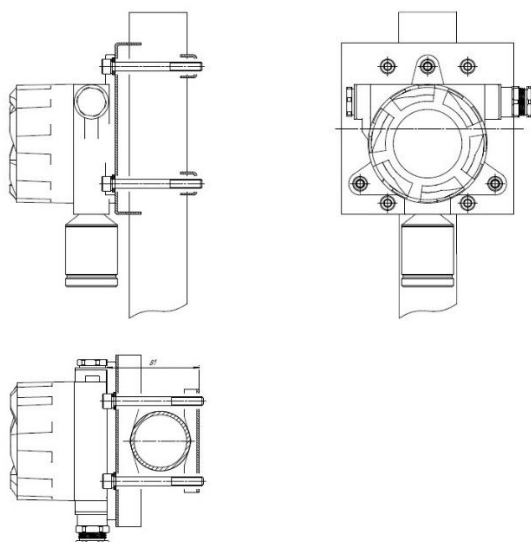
External view of the installation with Gas detector plate mounted on a pipe — Option 1
